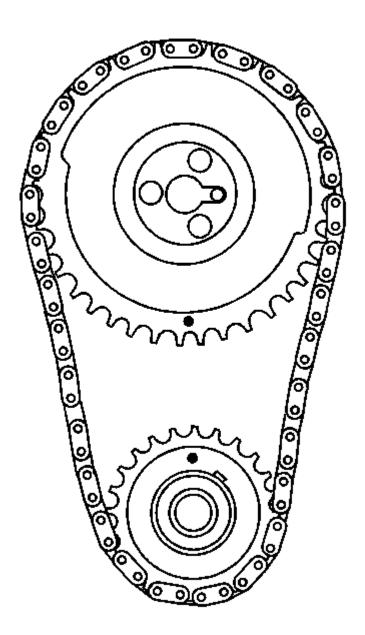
View Of Crankshaft & Camshaft Sprockets Aligned
